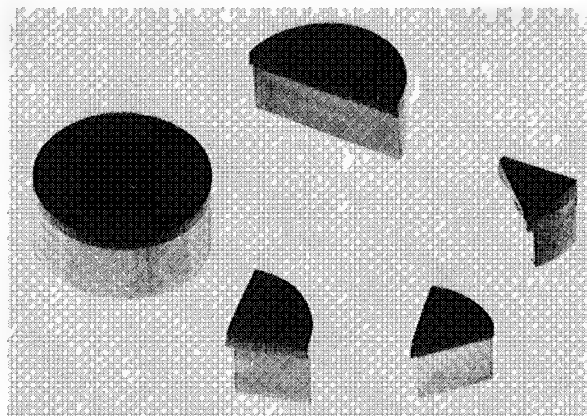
Sintered polycrystalline diamond cutting tool blanks.
